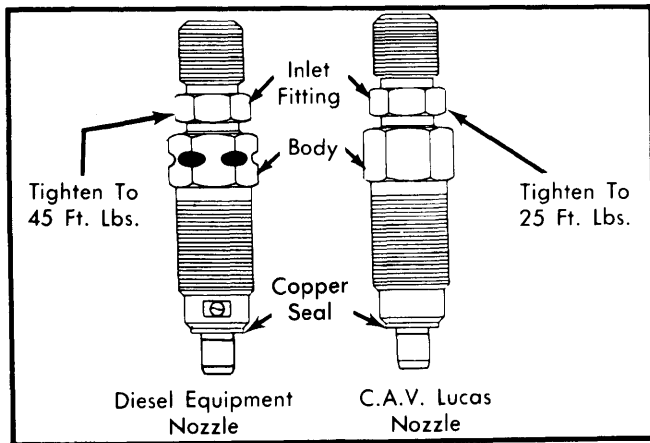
Diesel Injection Nozzle Identification (California Models)
